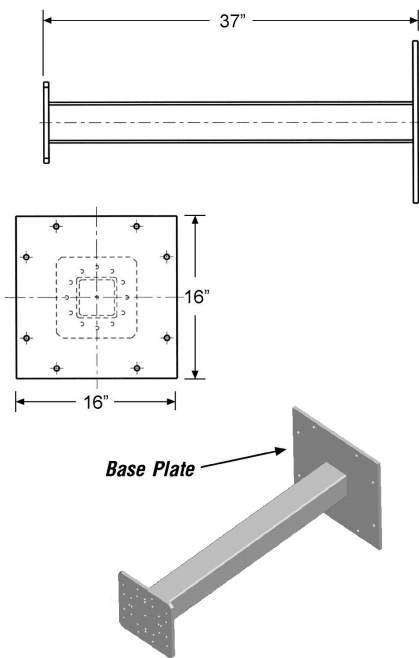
Floor Pedestal Mount - Similar to the Wall Pedestal Mount.
